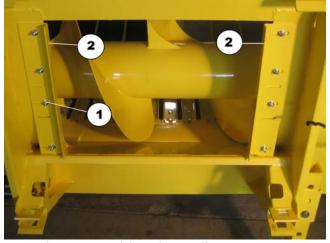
Filler Plate Adjustment Key 1 - Bolt (qty 8) Key 2 - Plate (qty 2)
